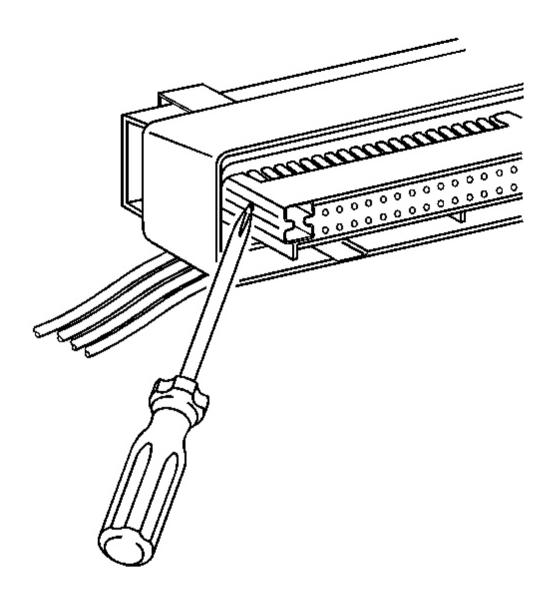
Locating Nose Piece Locking Tabs Courtesy of GENERAL MOTORS CORP.
